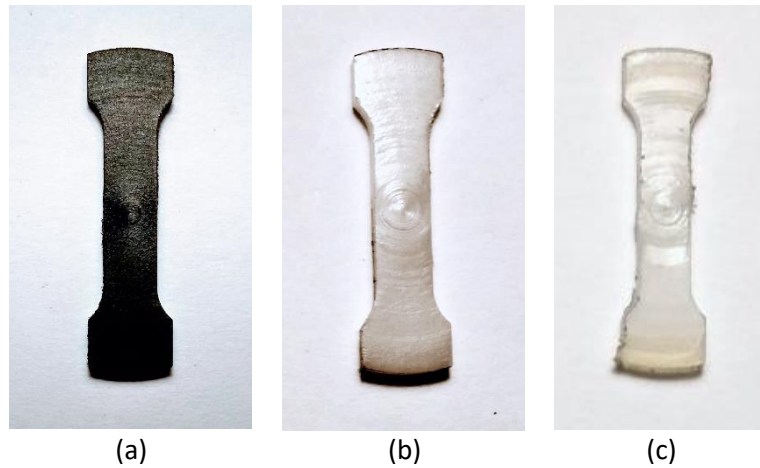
Machined specimens of (a) PA66 GF30, (b) PA66N and (c) PA6N.
